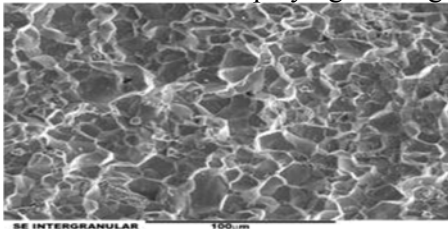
Intergranular fracture of an embrittled cast steel pneumatic wrench. [3]
